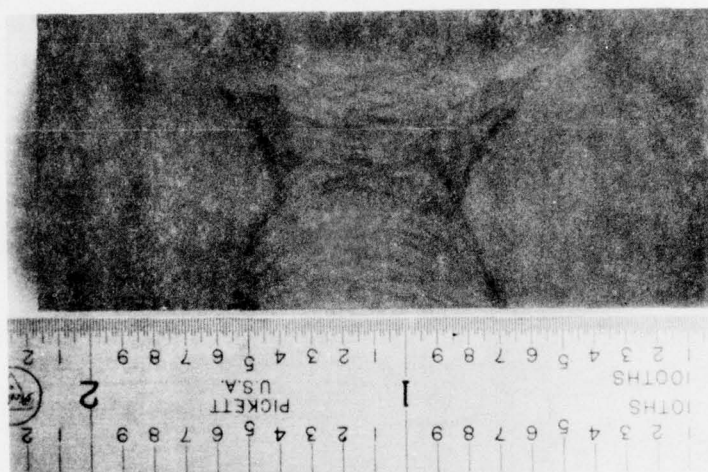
Macroetched section of upper 2/3 of Weld Q,
